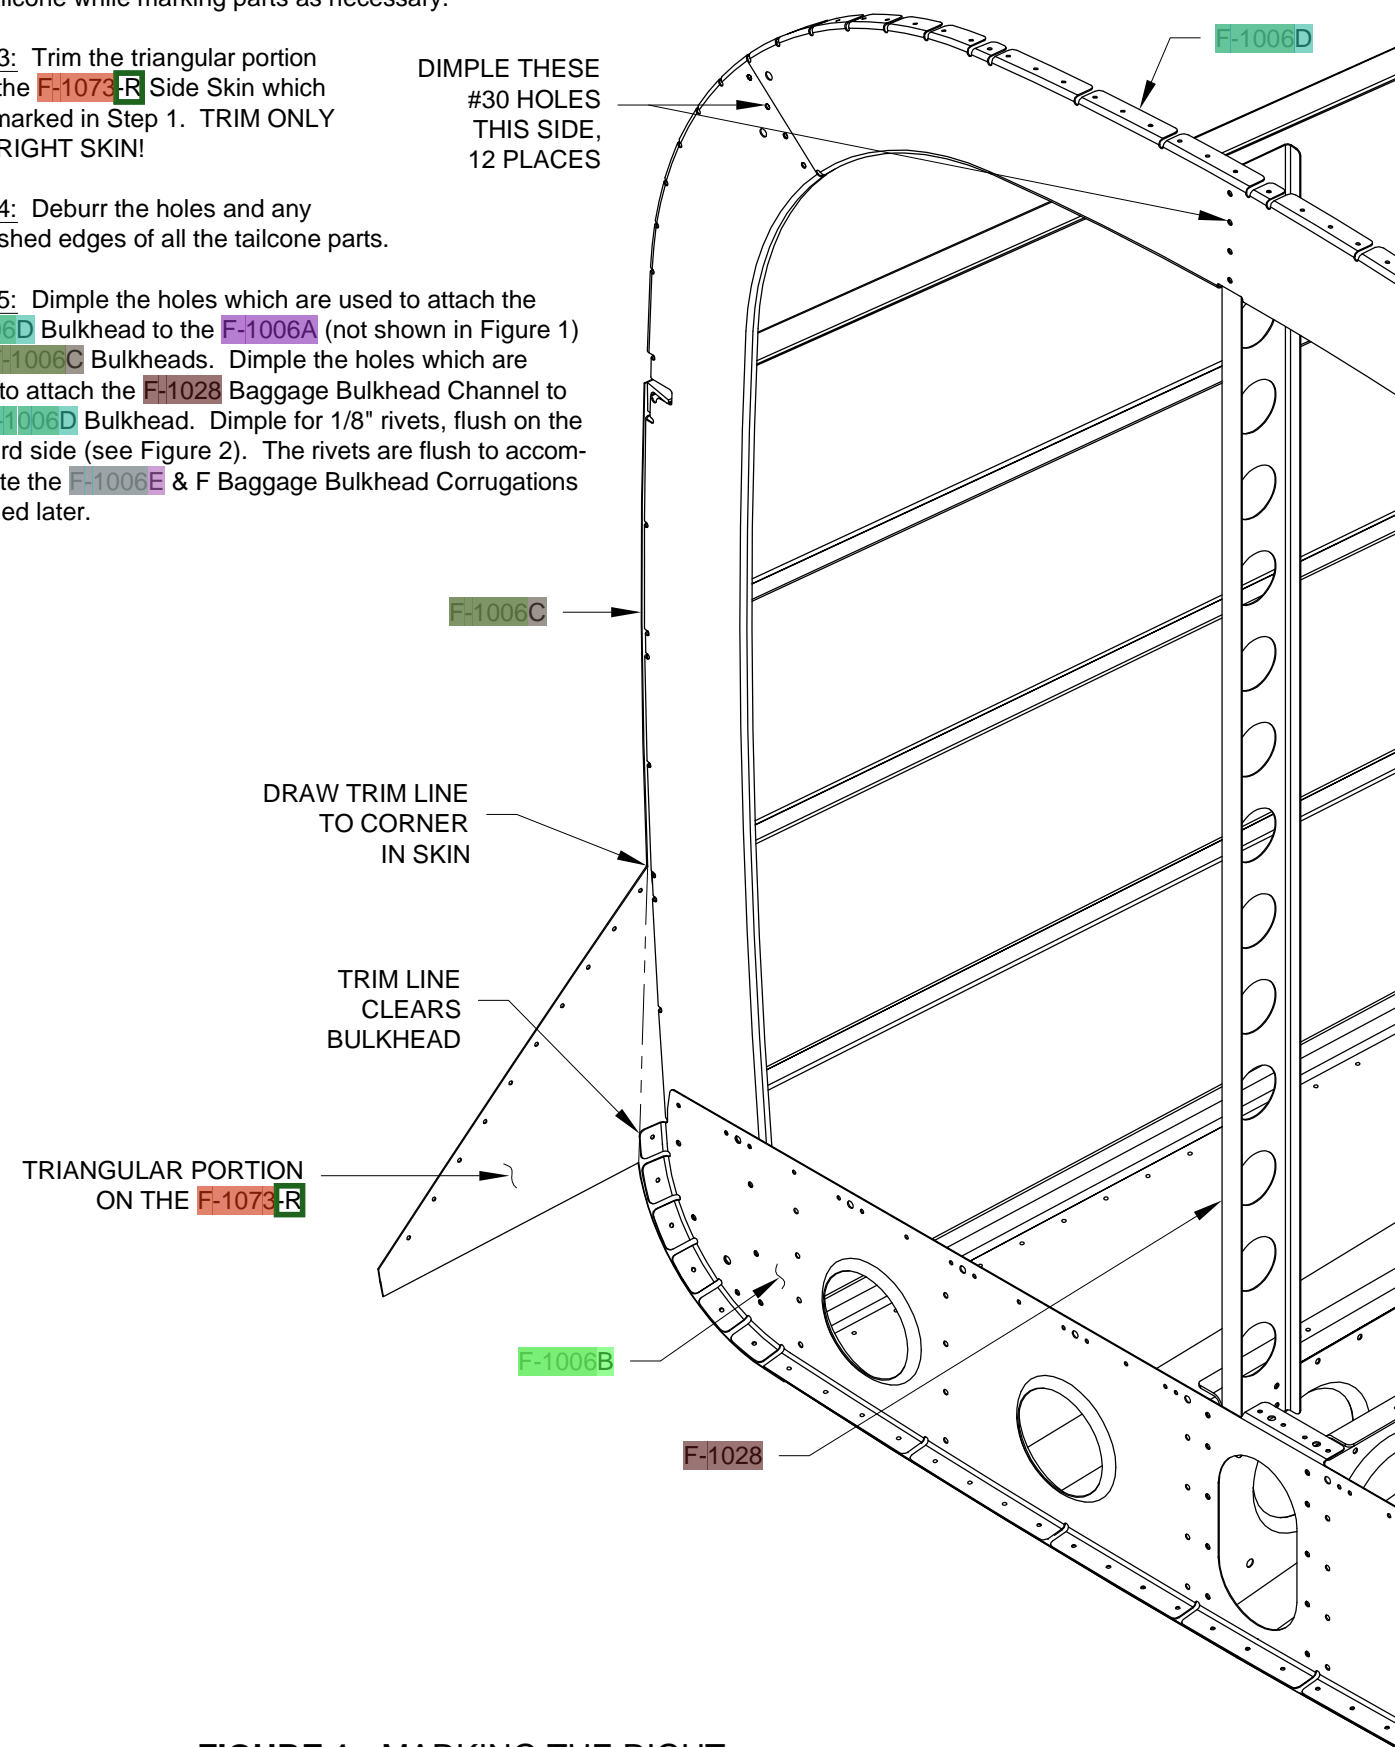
MARKING THE RIGHT SIDE SKIN FOR TRIMMING
